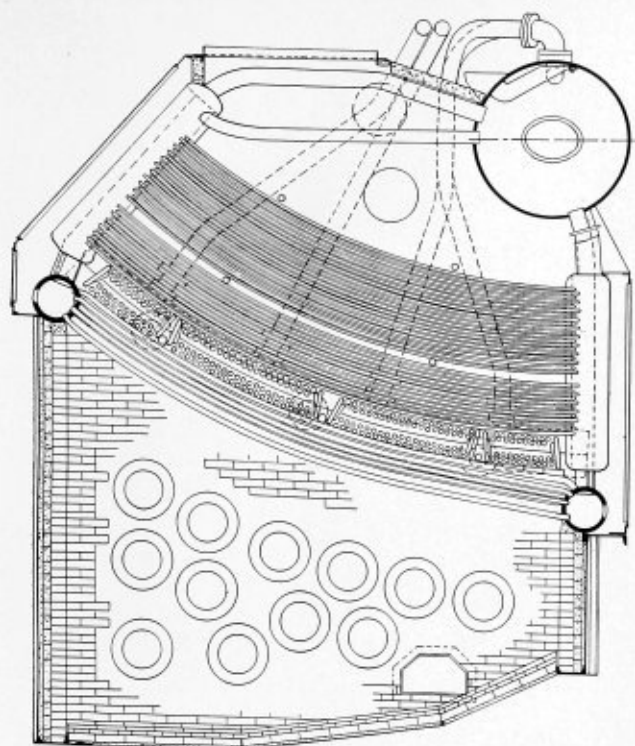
Babcock & Wilcox sectional express boiler (SX type), Unit C, Table 1
